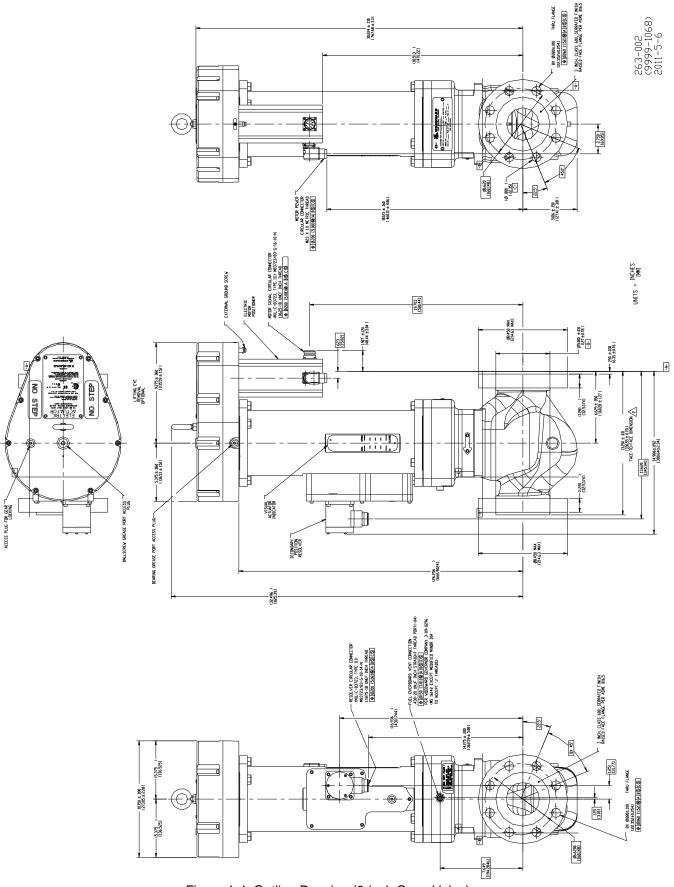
Outline Drawing (3-inch Cage Valve)
